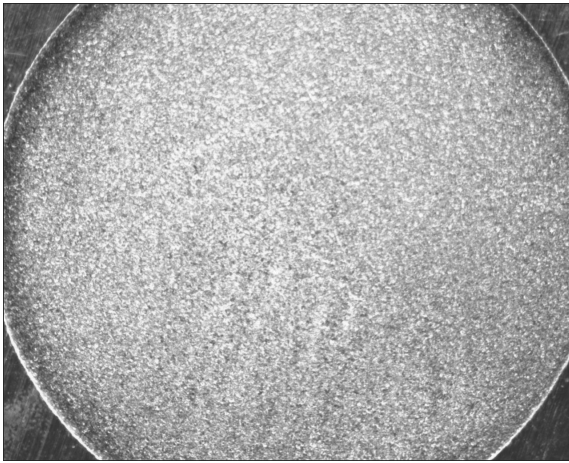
Surface roughness profile of CuZn40(C-2800B) specimen machined using optimal EDM parameter settings (A1B3C1D2)
